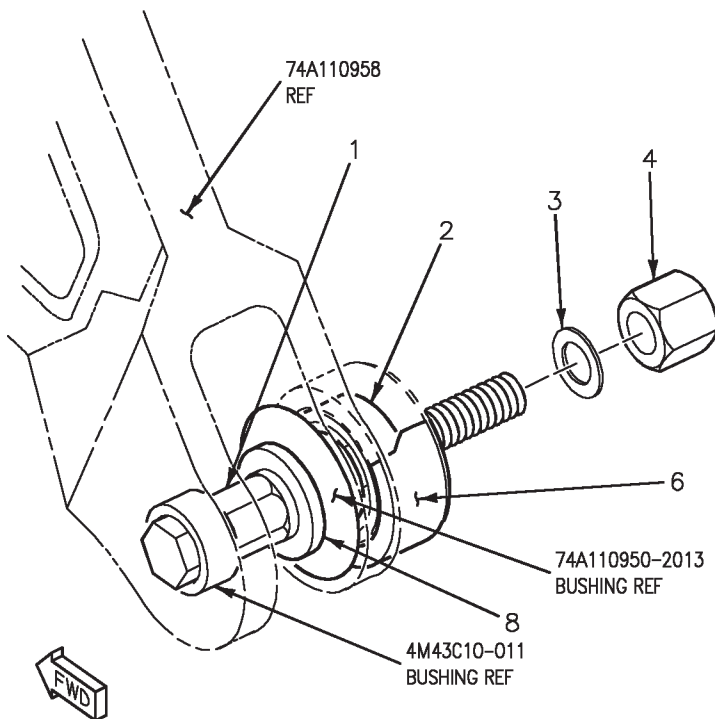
Bushing Removal, Installation, and Reaming (Sheet 7)
